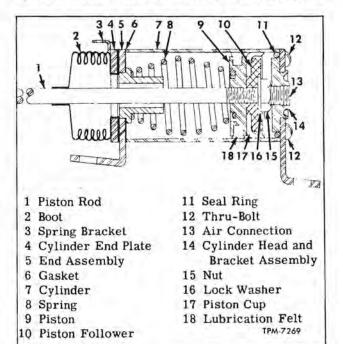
Sectional View of Radiator Shutter Air Cylinder
